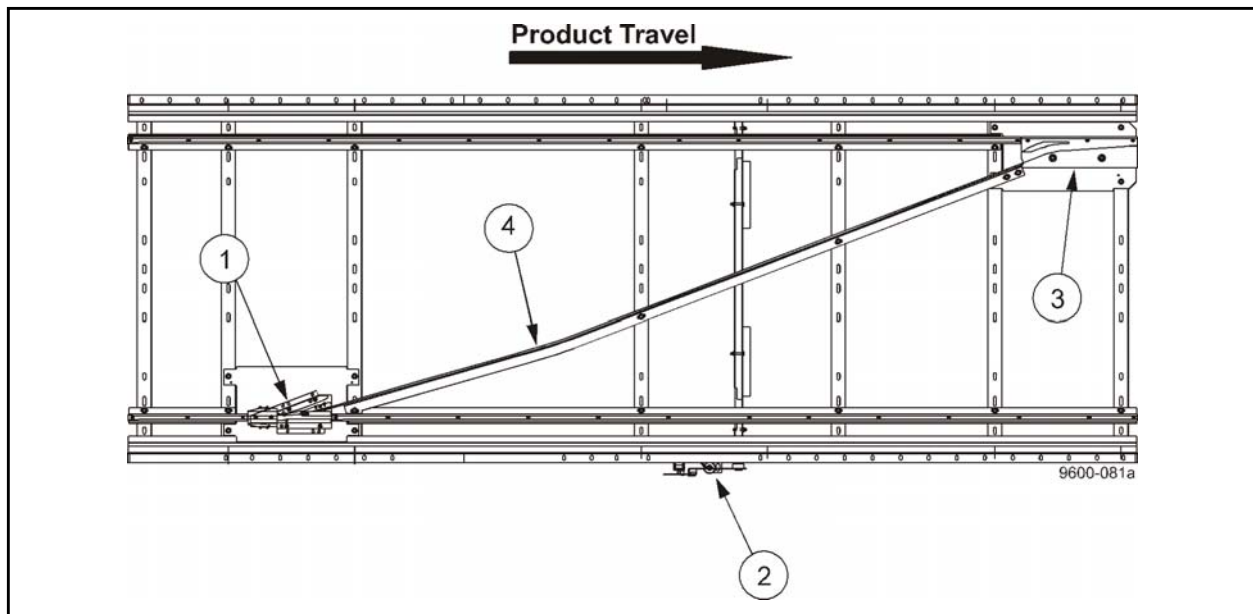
8 Intermediate Section - 16°/21° LH Divert - Drawing
